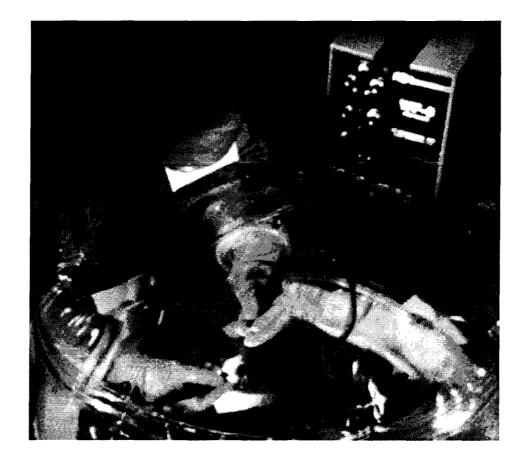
Welding in a Controlled Atmosphere
